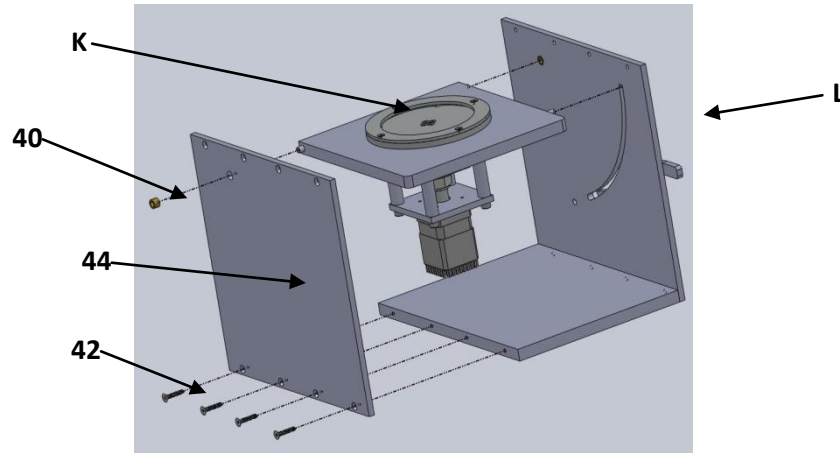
Chassis Assembly [2 of 4] (M) – (K, L, 40, 42, 44)
